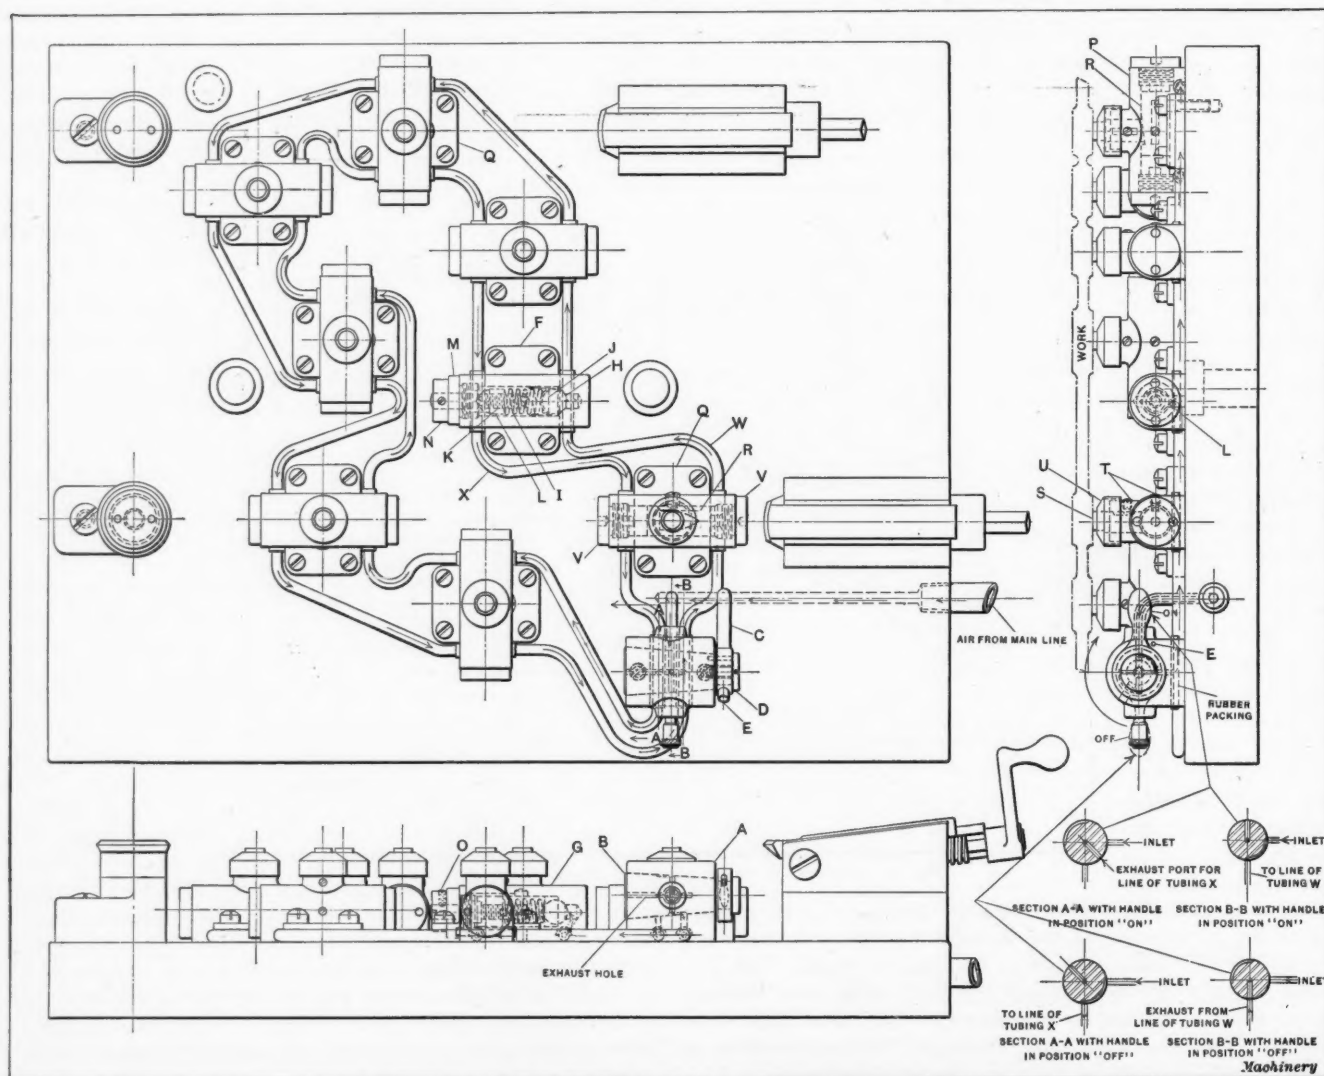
Fixture provided with Pneumatic Adjustable Wedge Stops
